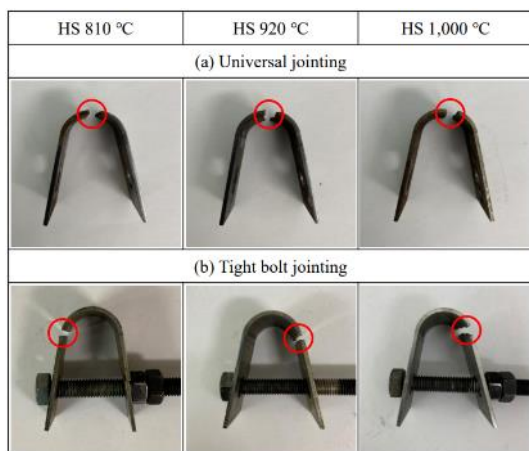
Photographs of the U-bent specimens of HS-810°C, HS-920°C, and HS-1000°C after the delayed failure tests, showing fracture area in the specimens with (a) universal jointing and (b) tight bolt jointing.
